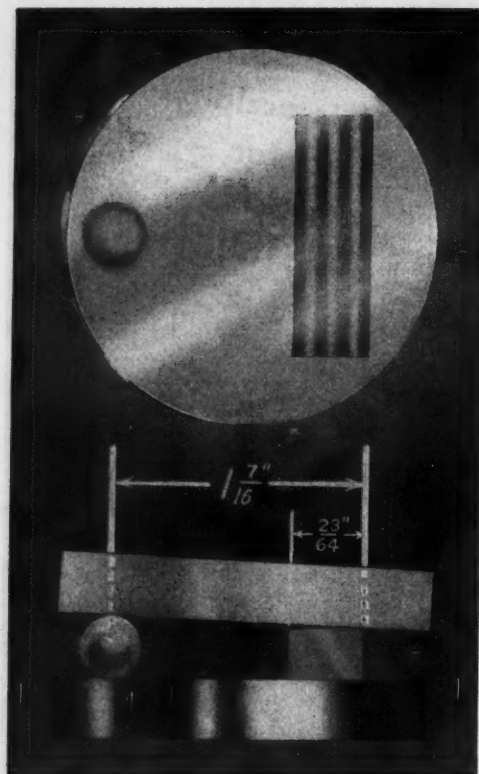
Measurement of Ball Diameter. There are $3\frac{1}{2}$ bands across gage block: If the gage block surface could be continued to the center line of the ball,
